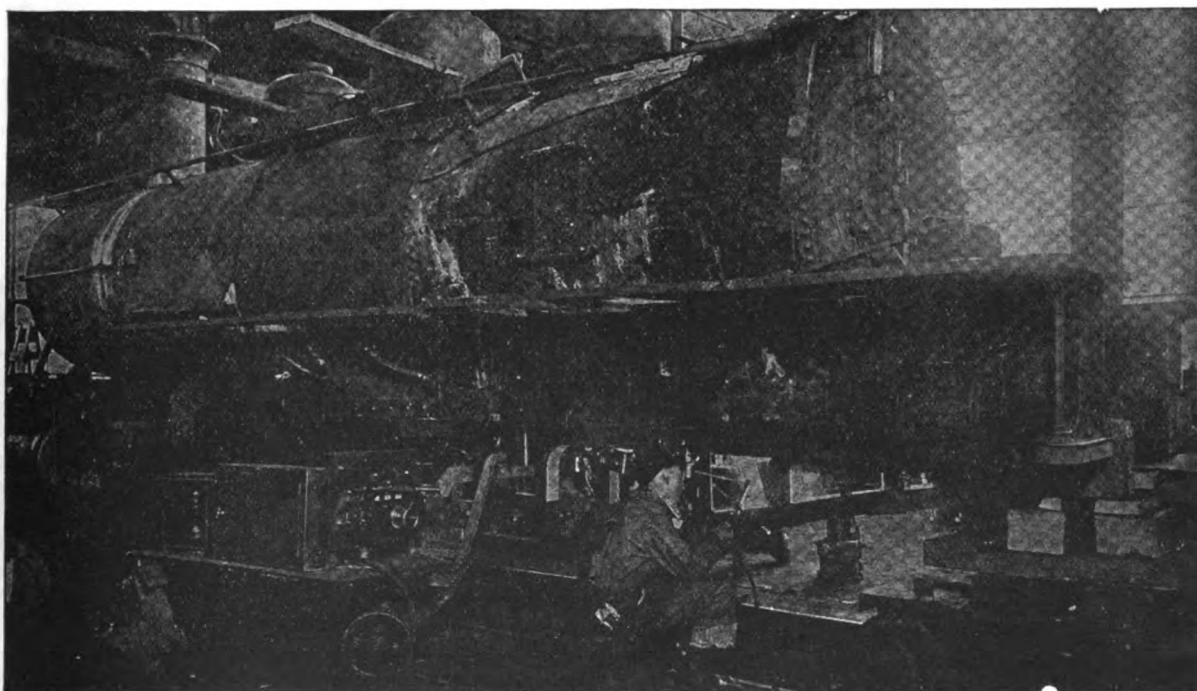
Welding a locomotive side frame, using a portable arc welder. The same week that this photo was taken \$6,000 were saved through arc welding on this welder
